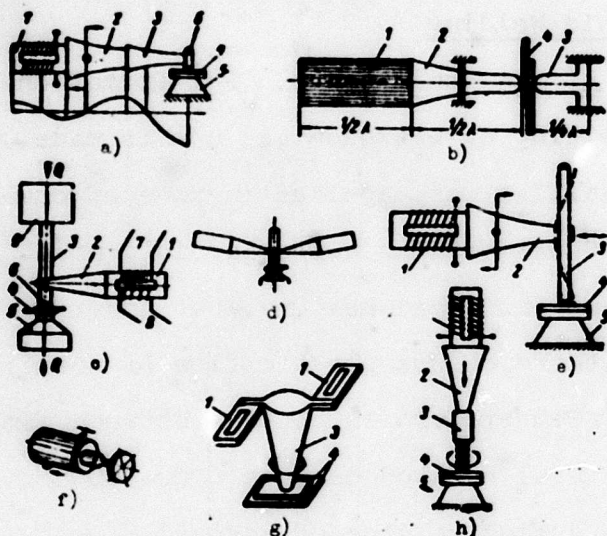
Diagrams of transmission of ultrasonic oscillations to welded components: a and b — from longitudinally-fluctuating tool, located parallel (a) and perpendicular (b) to welded surface; c and d — through tool, loaded by connected mass and accomplishing bend oscillations with one converter (c) and with coupled converters (d); e and f — through link, accomplishing bend oscillations, with free end of tool during point (e) and roller (f) welding; g — by means of revolving magnet; h — through tool with spiral threading; 1 — motor of magnetostrictive converter; 2 — transformer of longitudinal elastic oscillations; 3 — tool; 4 — welded component; 5 — support; 6 — tip; 7 — winding of magnetizing current; 8 — winding of high-frequency current; 9 — connected mass.
